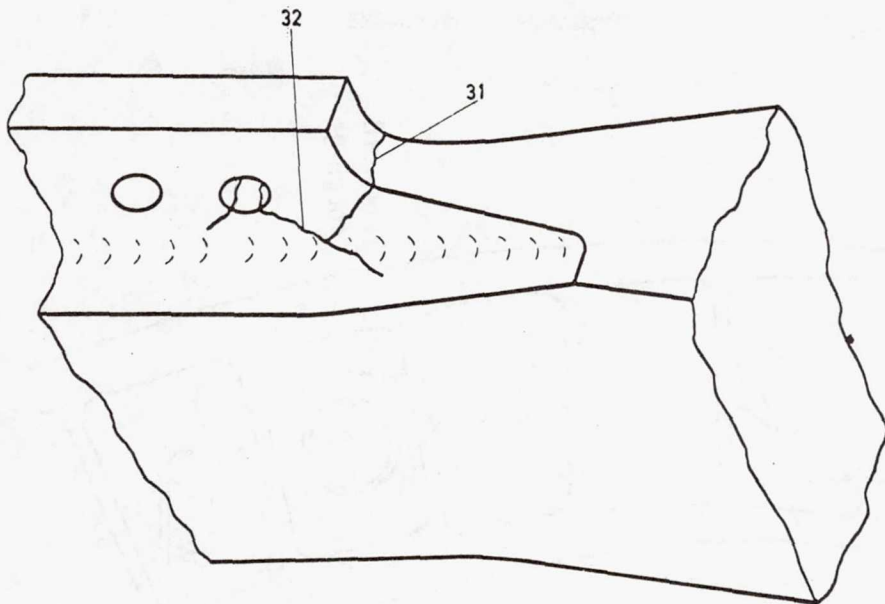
Test specimen A<sub>3</sub> with cracks found.
